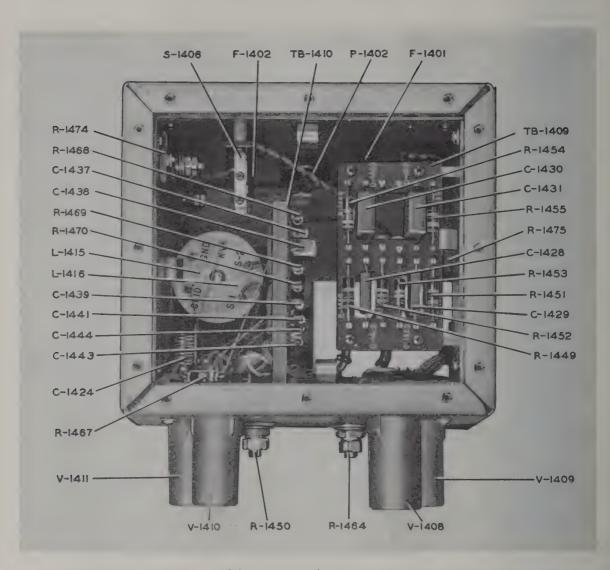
Frequency-Shift Keyer KY-45/FRT-5, Oven Assembly, Bottom View.
